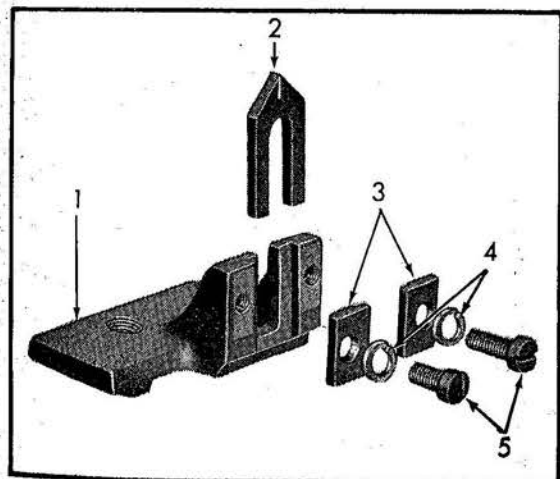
Sequence of Reassembly of Rear Luminous Sight
